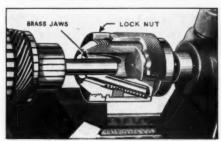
Adjustable support bushing used in tailstock of lathe for supporting armature shaft.
